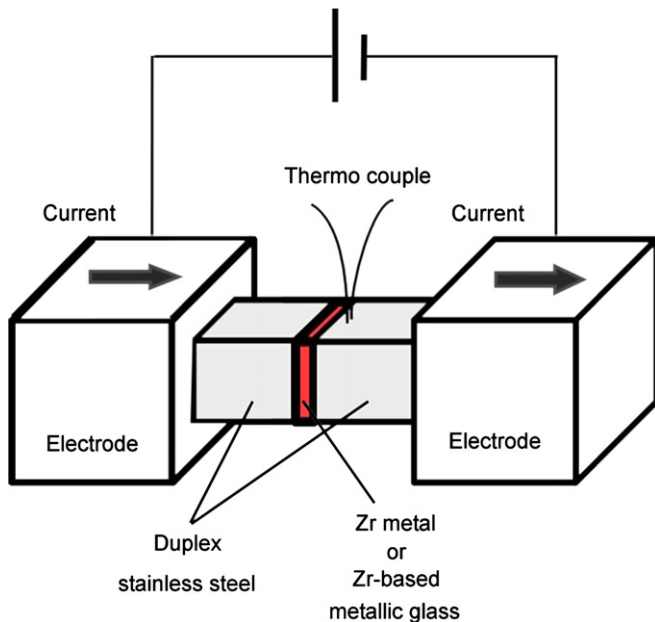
Schematic illustration of resistance welding apparatus.
